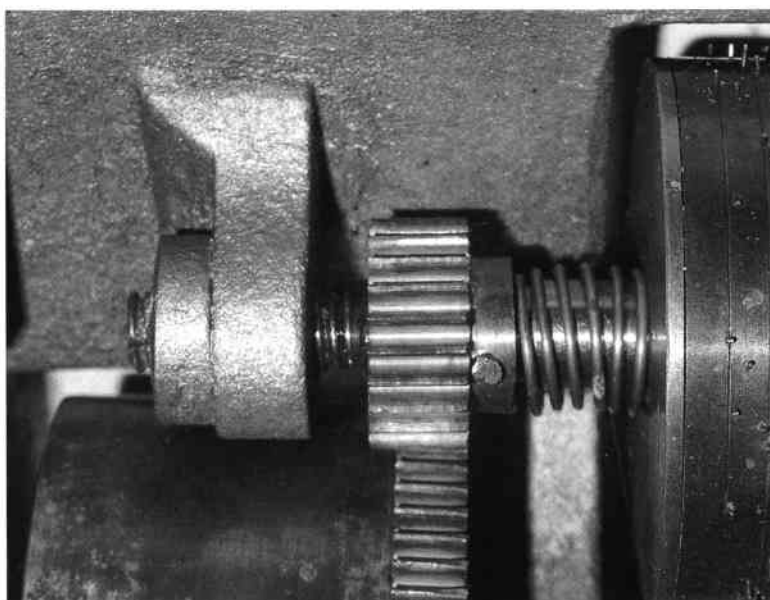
Bass end steel female bearing screwed through locking nut and bedplate bracket. The cylinder gear is pinned to the arbor which runs in these conical bearings.
